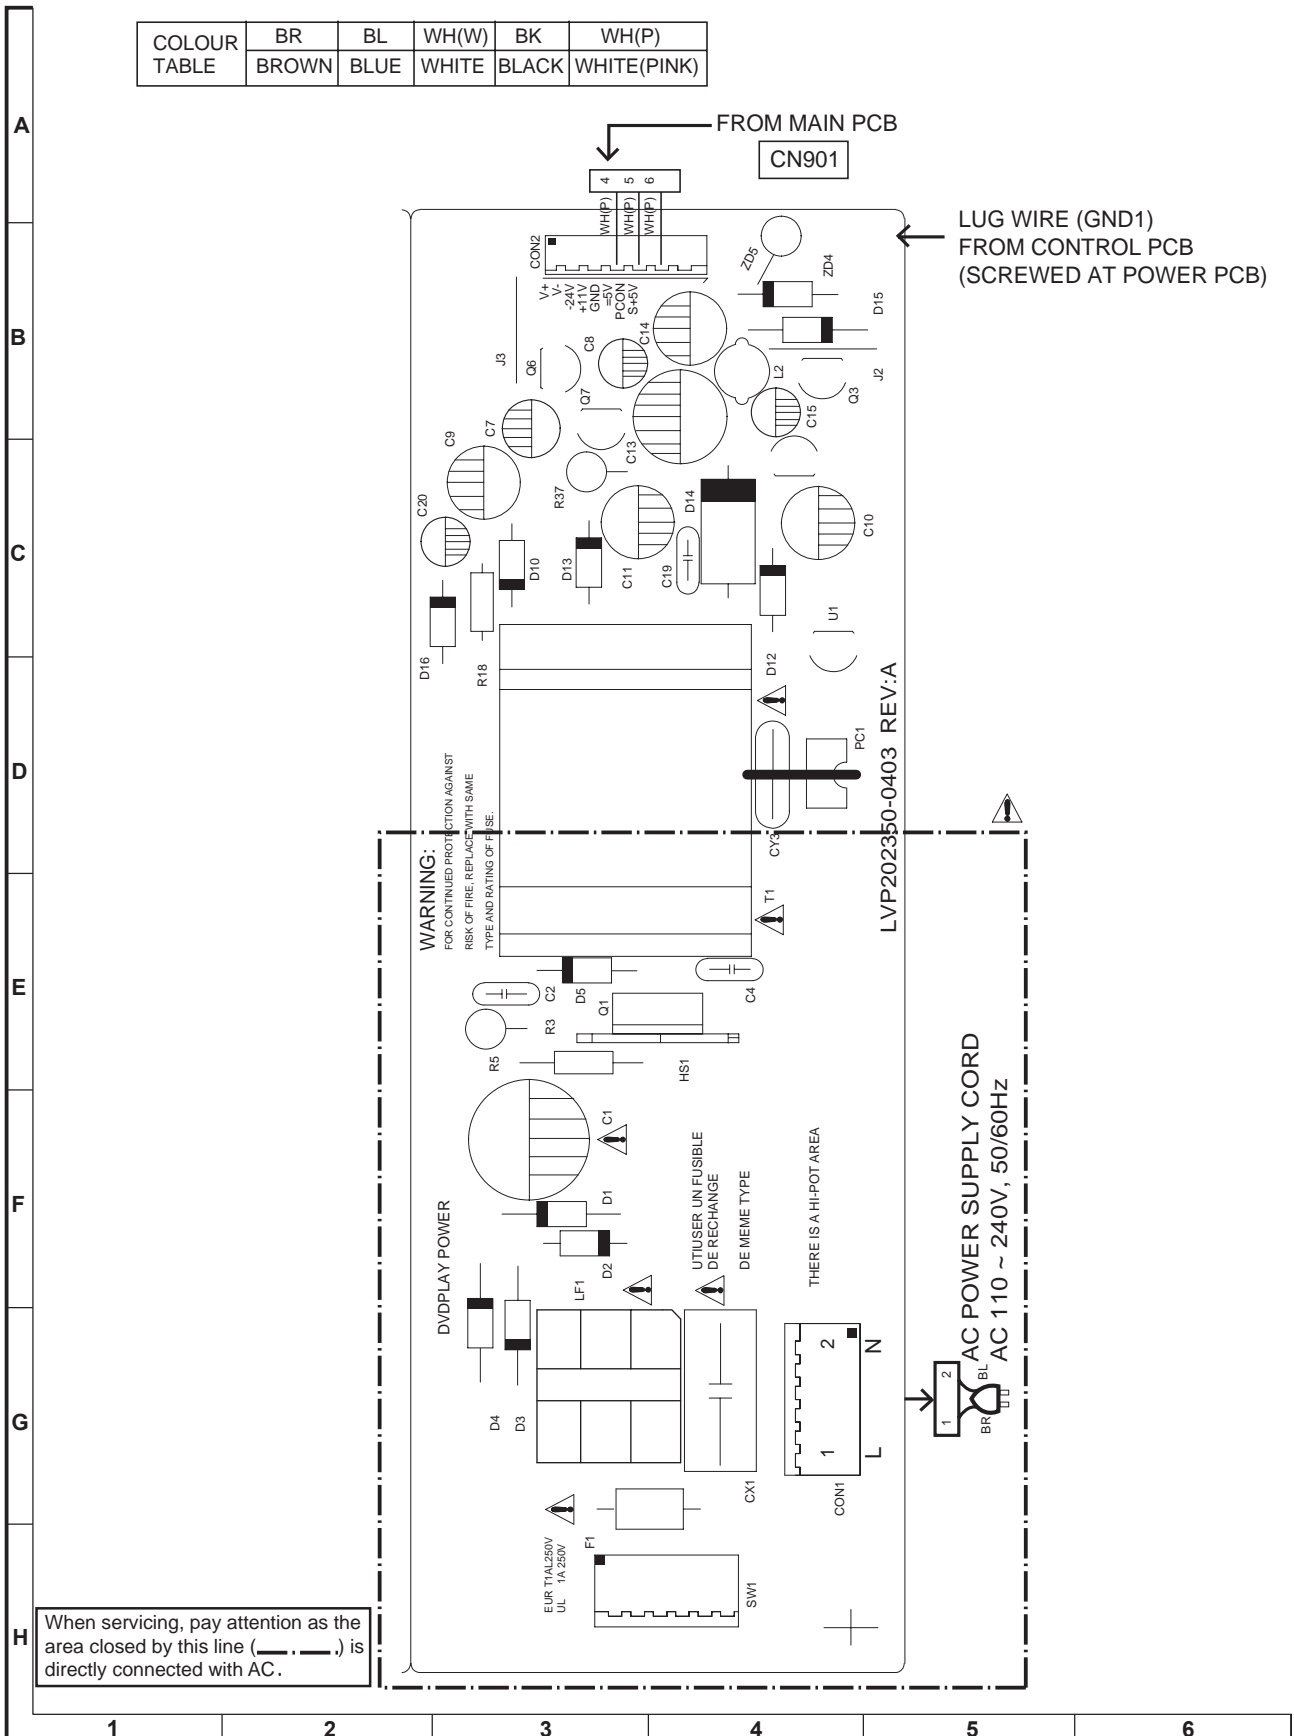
WIRING SIDE OF POWER PCB (TOP VIEW)
